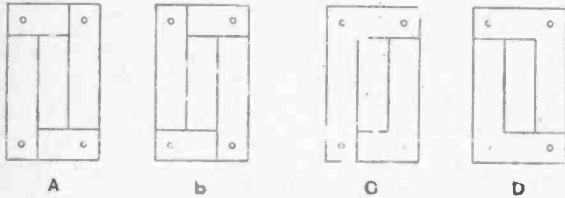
Method of assembling core pieces. The first layer is arranged as at A or C, the second layer as at B or D, and so on.
